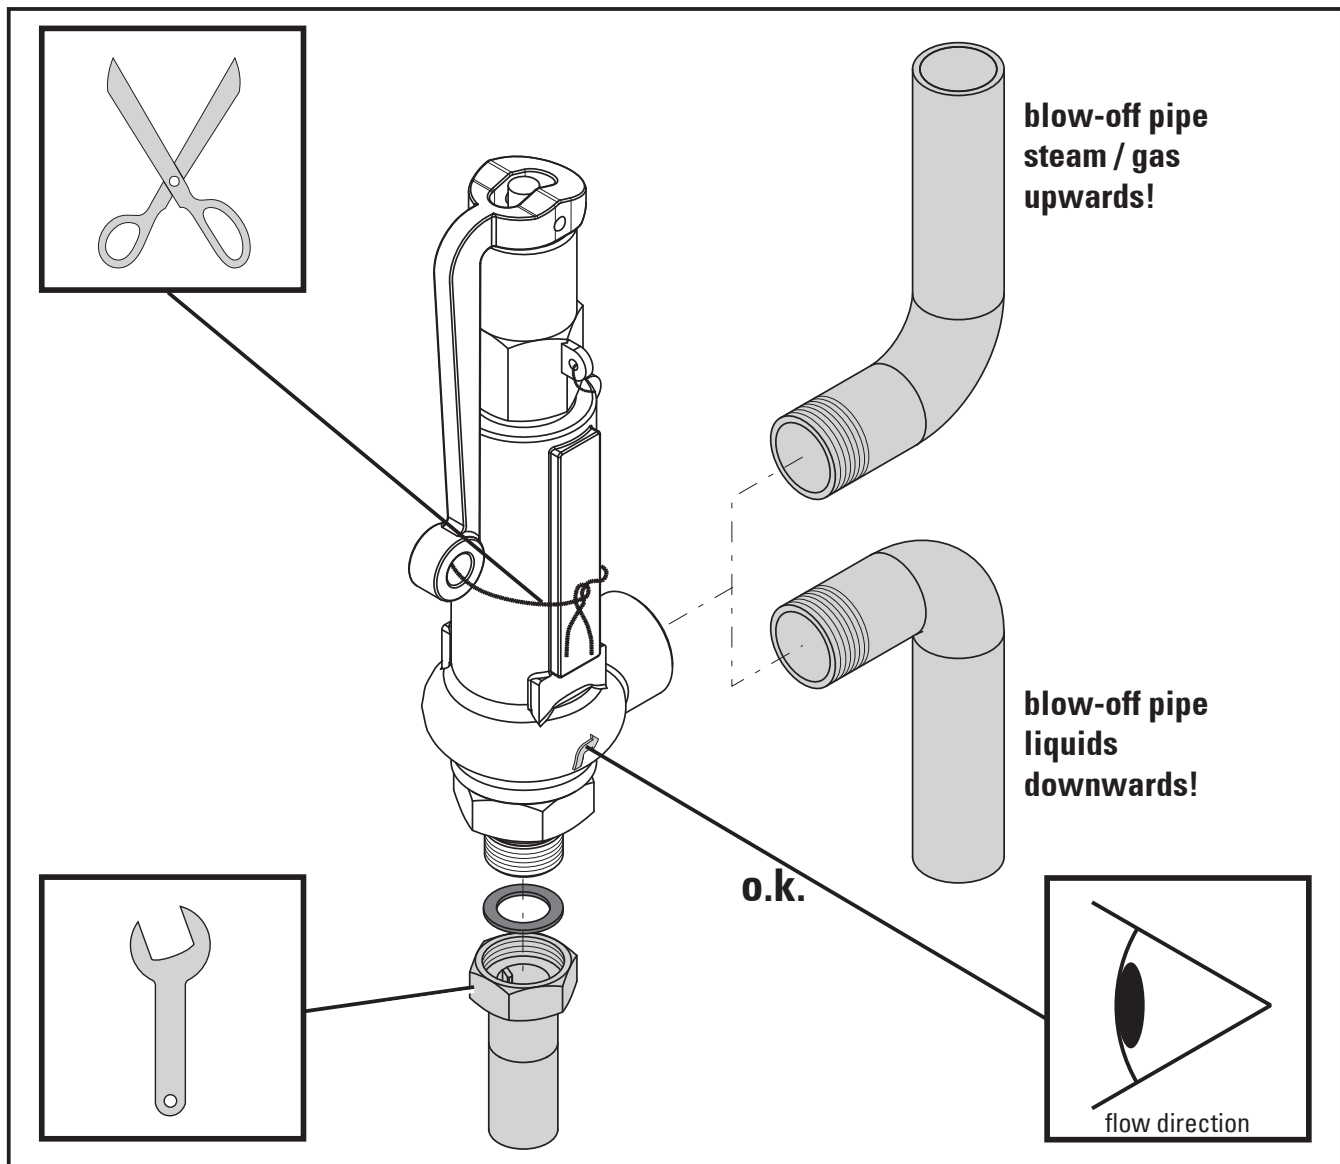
Pressure Relief Valves, Mounting with threaded connection (Fig. shows Art. NG301023 with head „A“)
